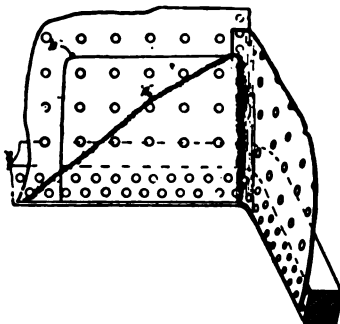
CORNER PATCH IN SIDE SHEETS.
